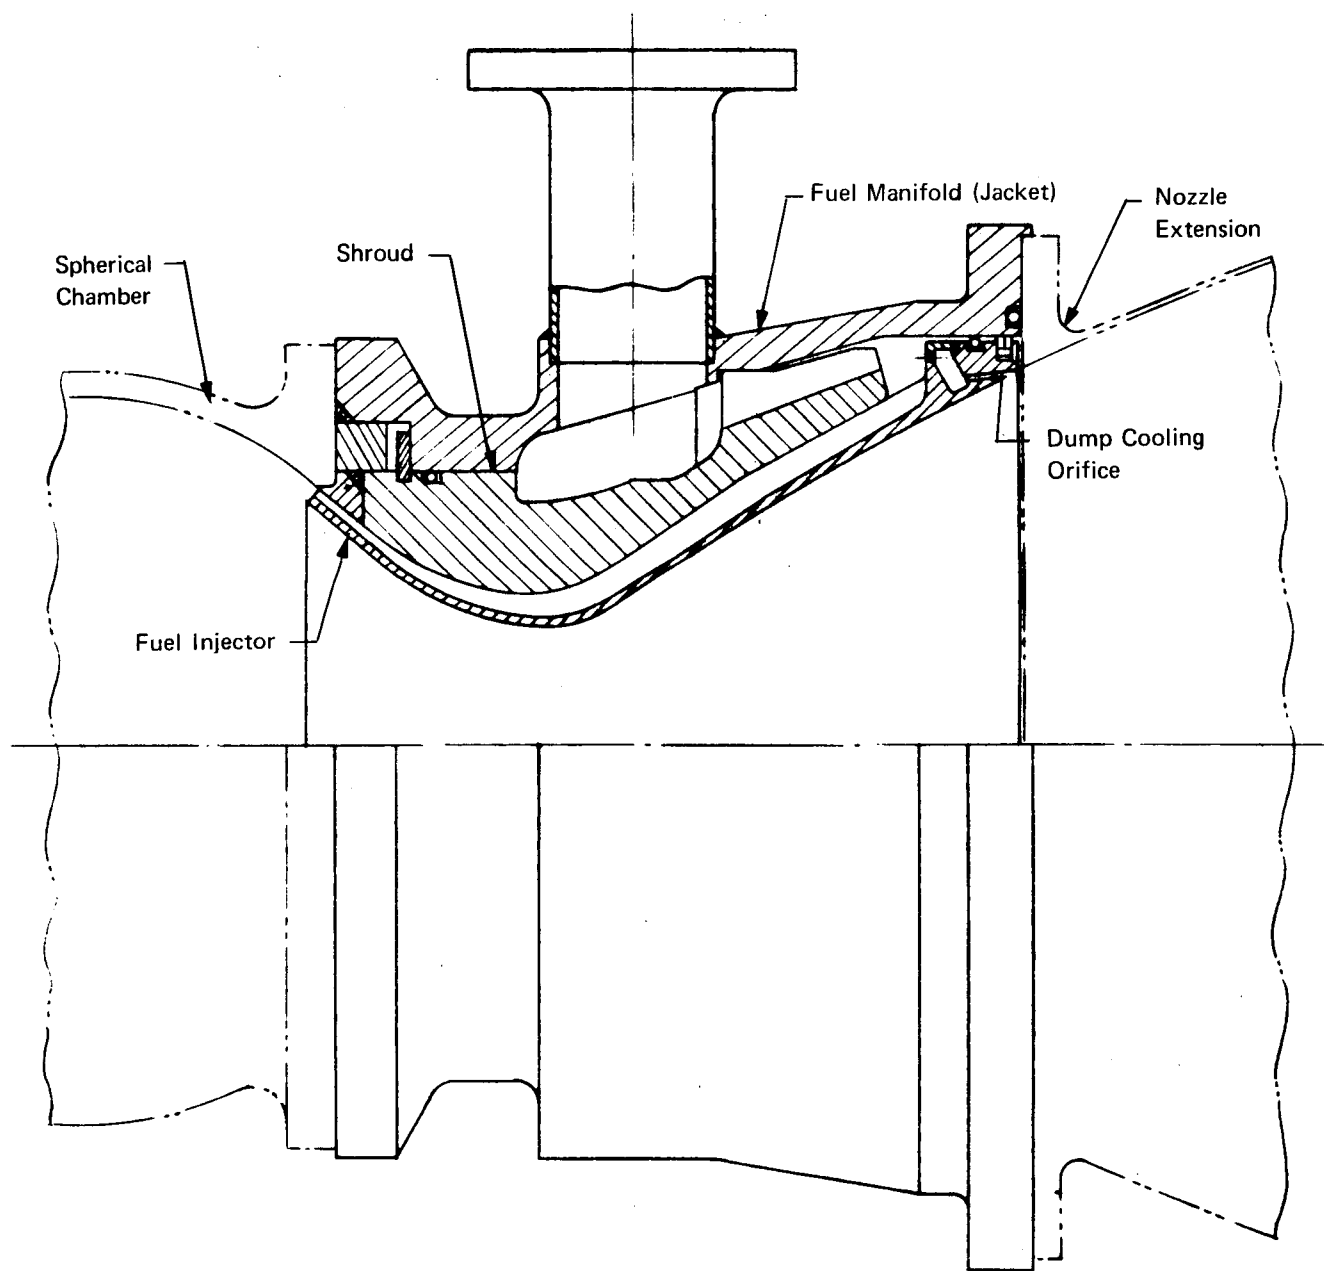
Regeneratively Cooled Fuel Injector, Shroud, and Manifold Assembly
